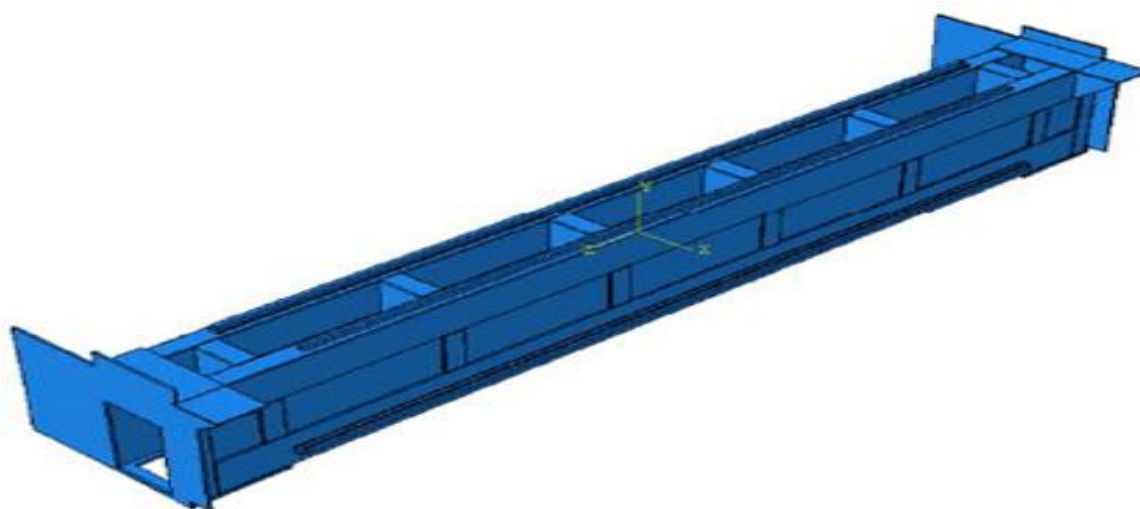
Beam solid model of three dimensional numerical control laser cutting machine
